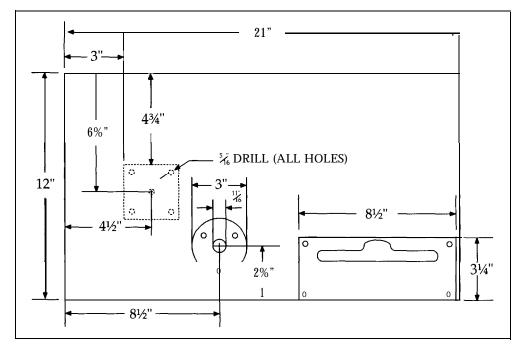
The Top View of the Flutophone Assembly Unit.
